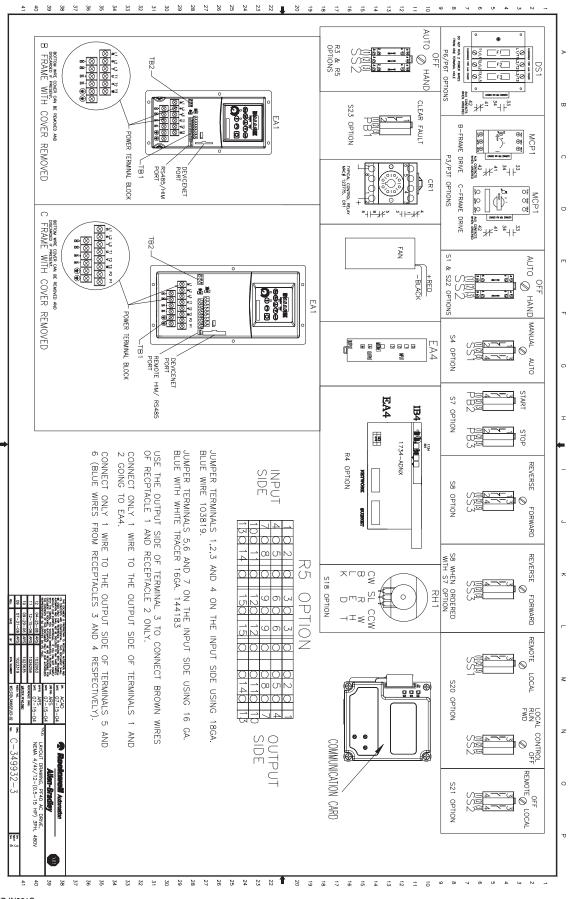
PowerFlex 40 General Option Layout Drawing
